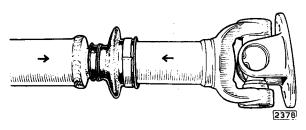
Showing the arrows on the sliding joint and drive shaft.
